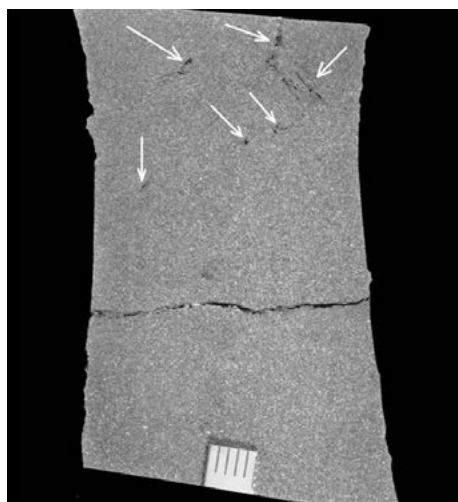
Macrostructure of the weld of joint S1 in the crack zone. The arrows indicate the location of gas pores in the weld
